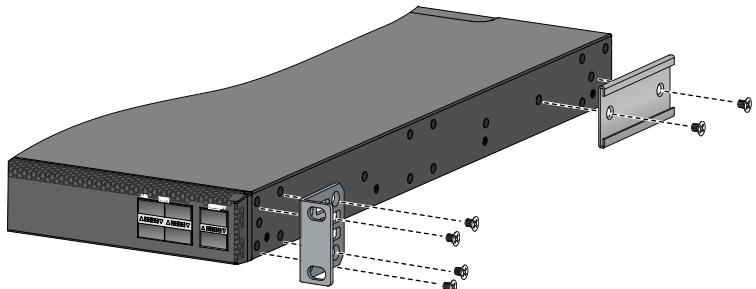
Attaching the mounting brackets and chassis rails to an HPE 5710-54HF switch (mounting brackets installed near the power supply side)
